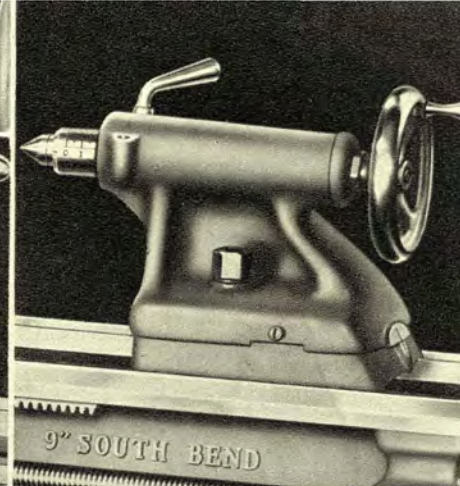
Tailstock Design Used on 9" Swing Lathes
